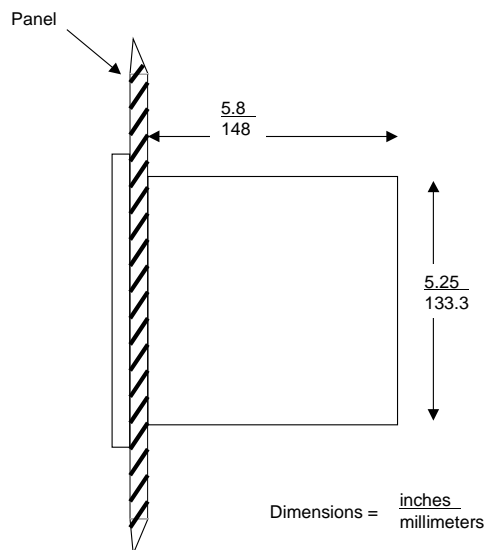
Operator Interface Panel Mounting Dimensions, Type 4X, Model 552
